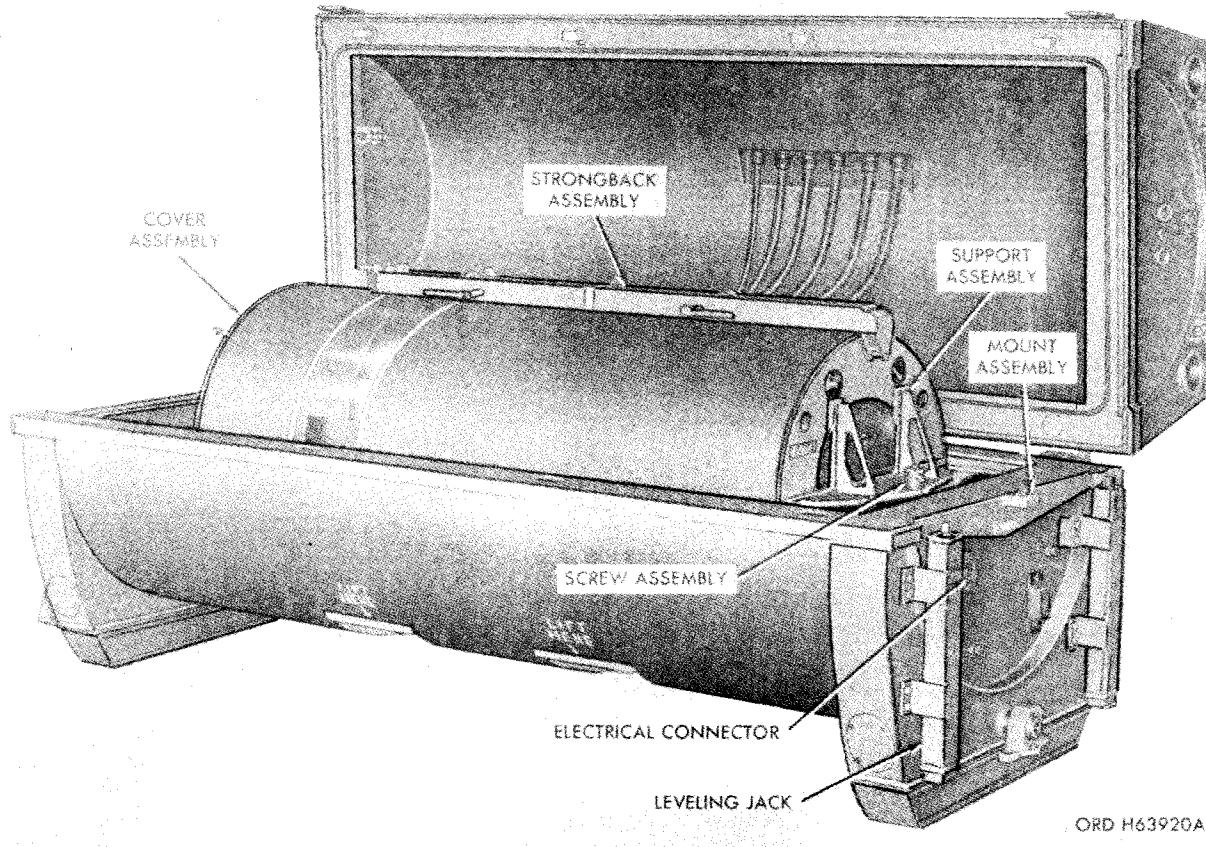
GUIDANCE-SECTION CONTAINER XM420 WITH GUIDANCE SECTION.
